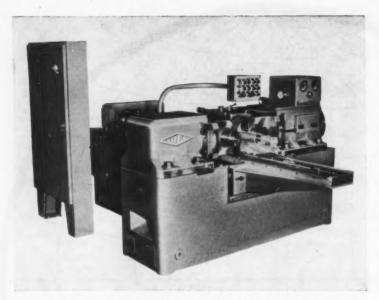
Hy-Duty thread-rolling and forming machine built by Landis Machine Co.
